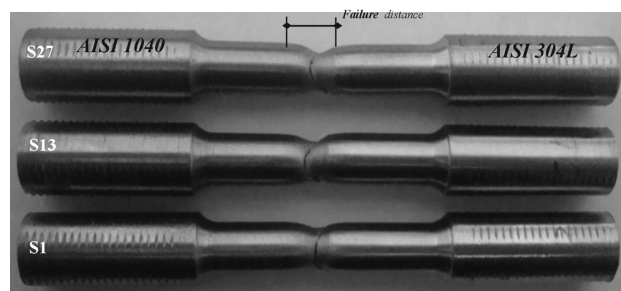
Typical failure locations on the tensile-test samples of friction-welded joints
